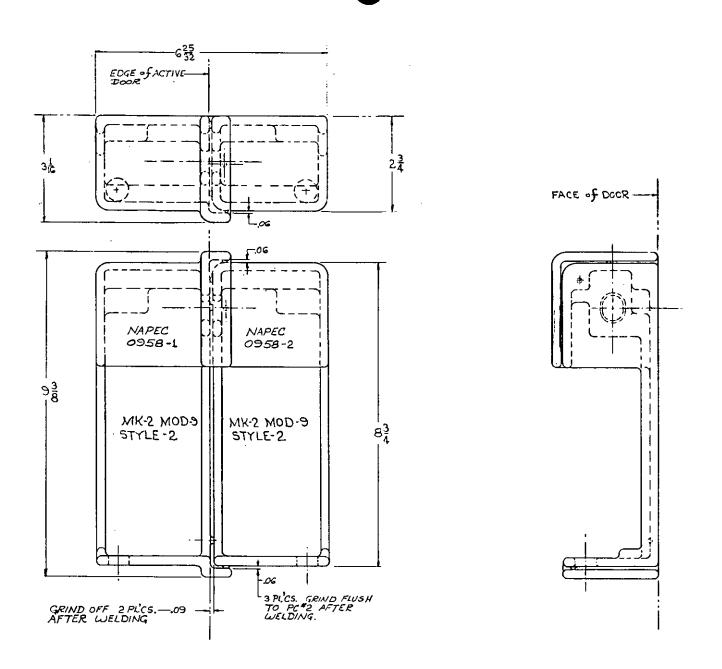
Style 2, MK 2 MOD 9 from Drawing 5532335, Sheet 1 of 3
